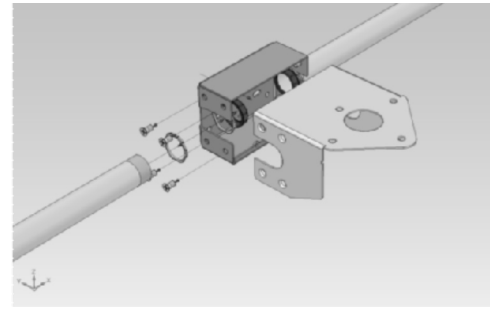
Example of Design for Manufacture and Assembly (Boothroyd and Dewhurst [1])
